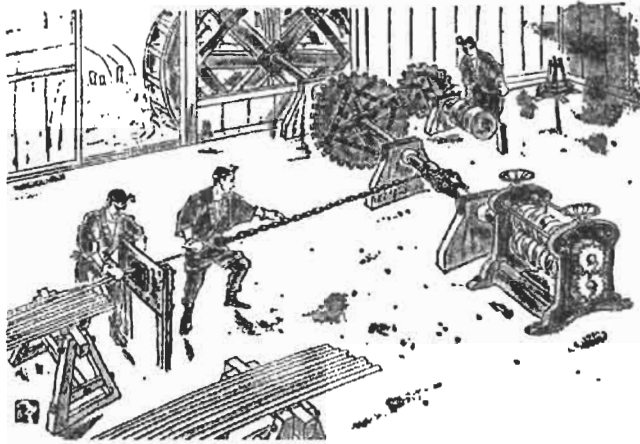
Wiredrawing operation using a waterwheel in old Japan.
